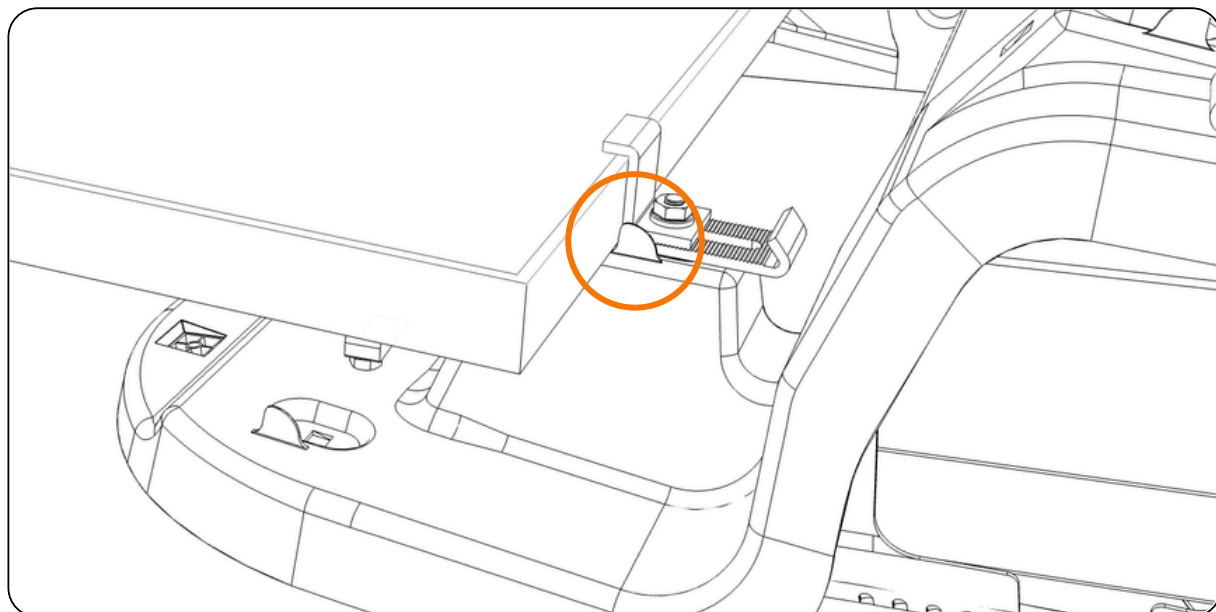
Reference Tab (shown on 6° lower bolt placement)
